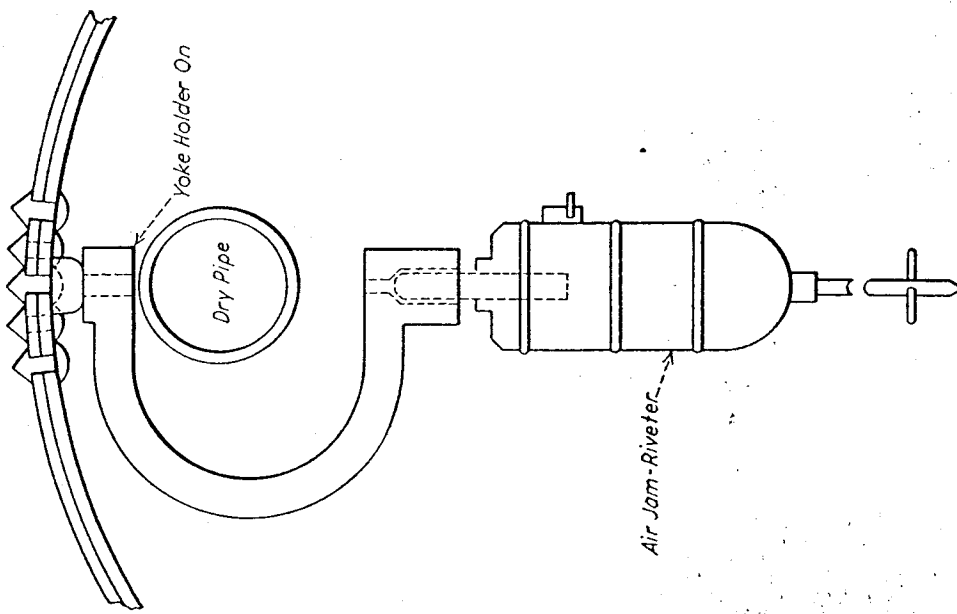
Home-made yoke holder-on—uses: shell courses without removing drypipe; outside throat sheet without removing combustion chamber sheet, etc.
